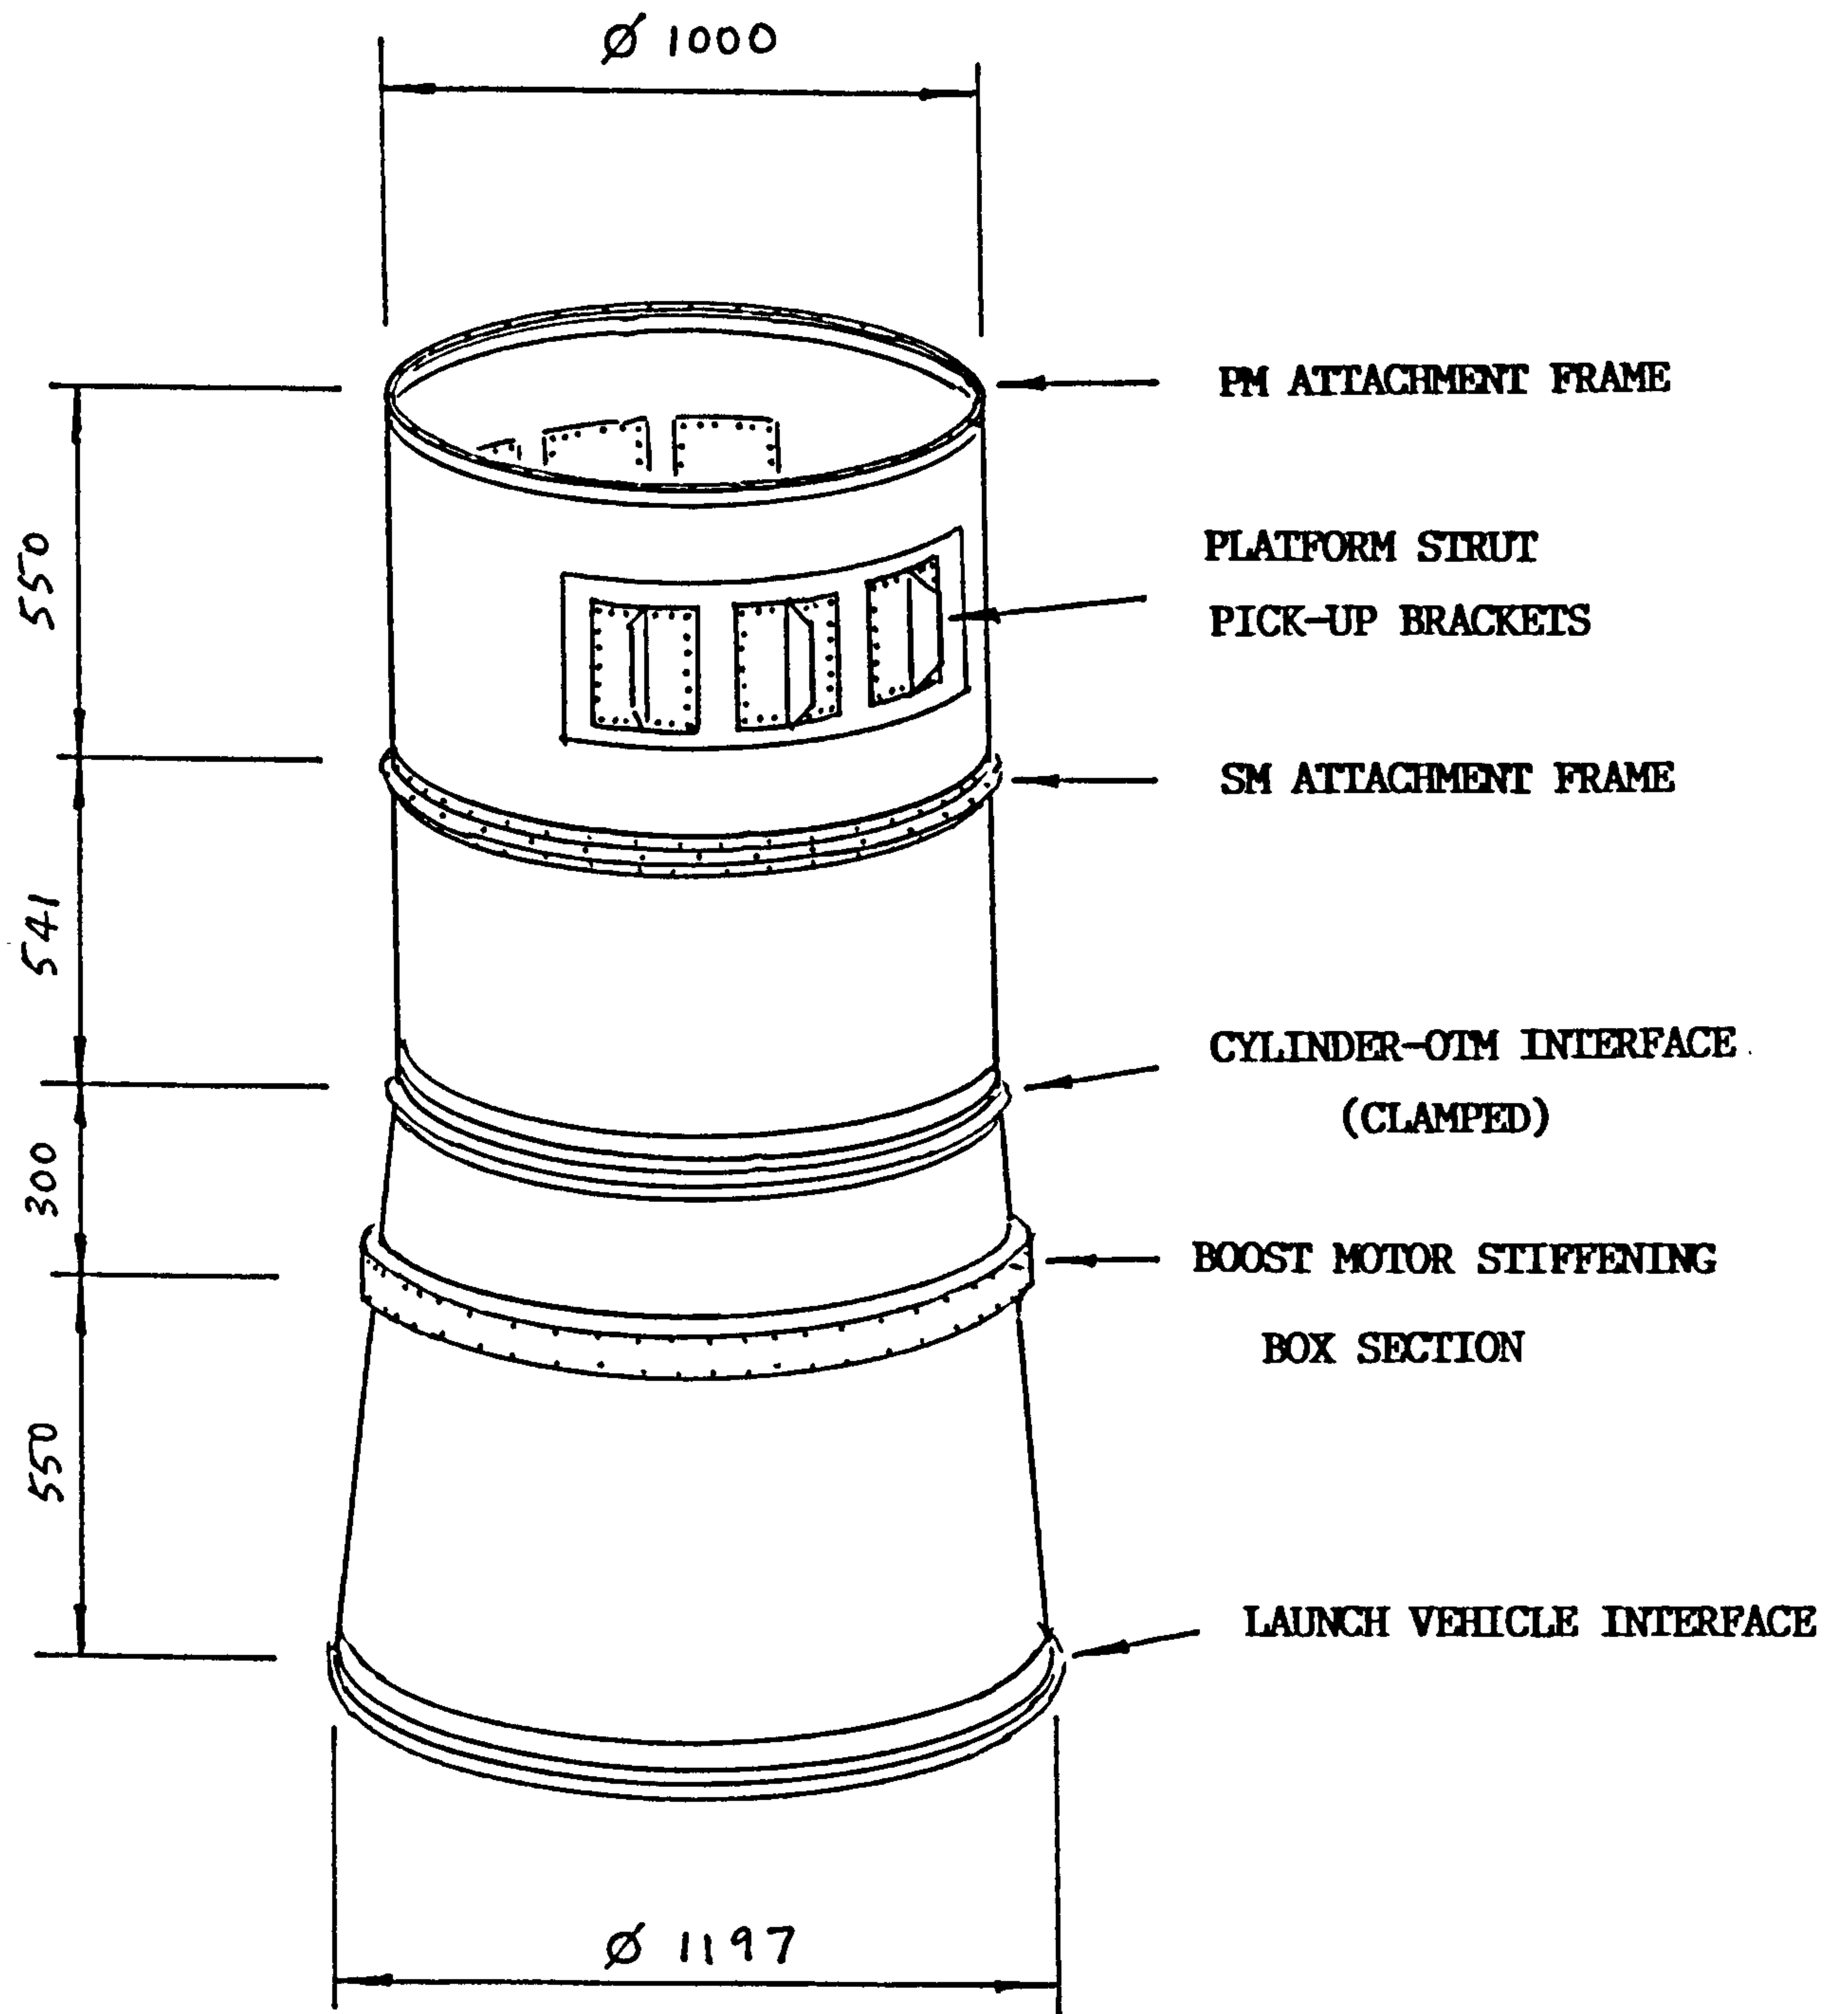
T-SAT SPACECRAFT THRUST TUBE
